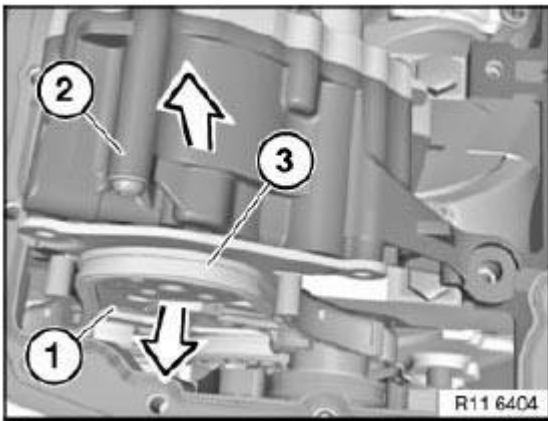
Identifying Drive Gear, Oil Pump And Timing Chain
